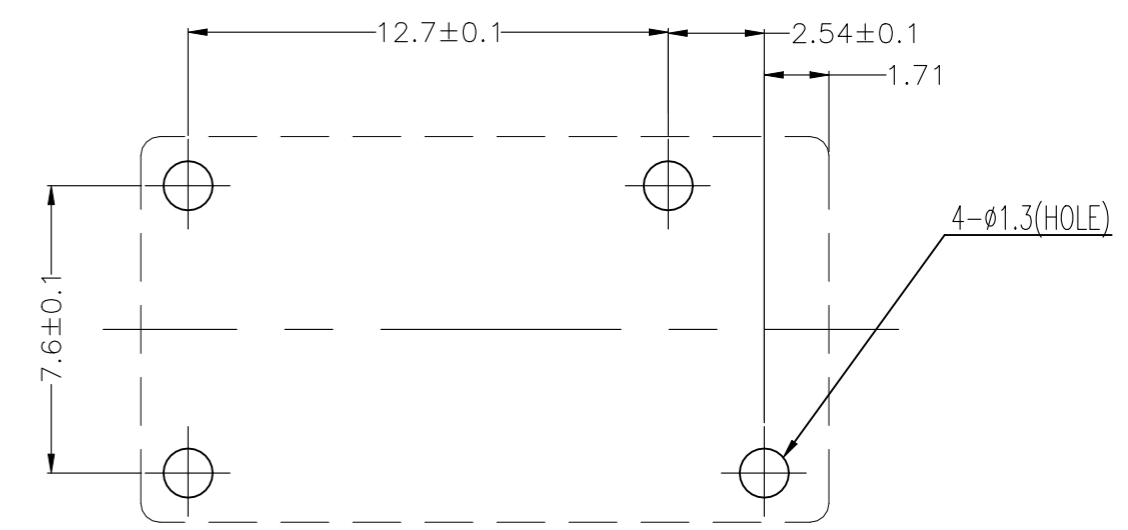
FIGURE FOR PRINTED CIRCUIT BOARD PROCESSING (BOTTOM VIEW)
